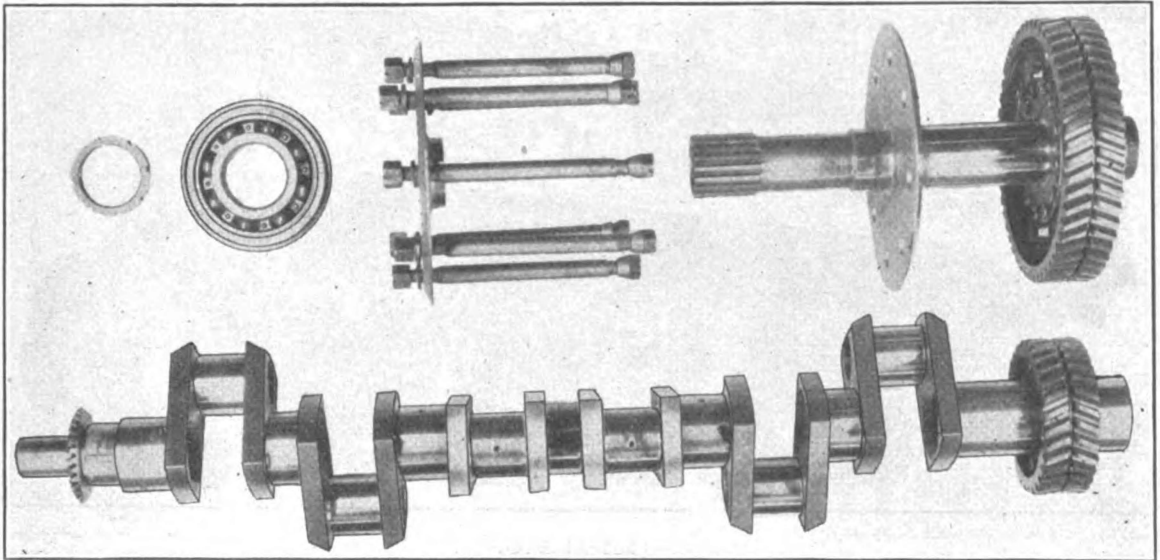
Crankshaft, reduction gear, propeller shaft, and propeller hub.
